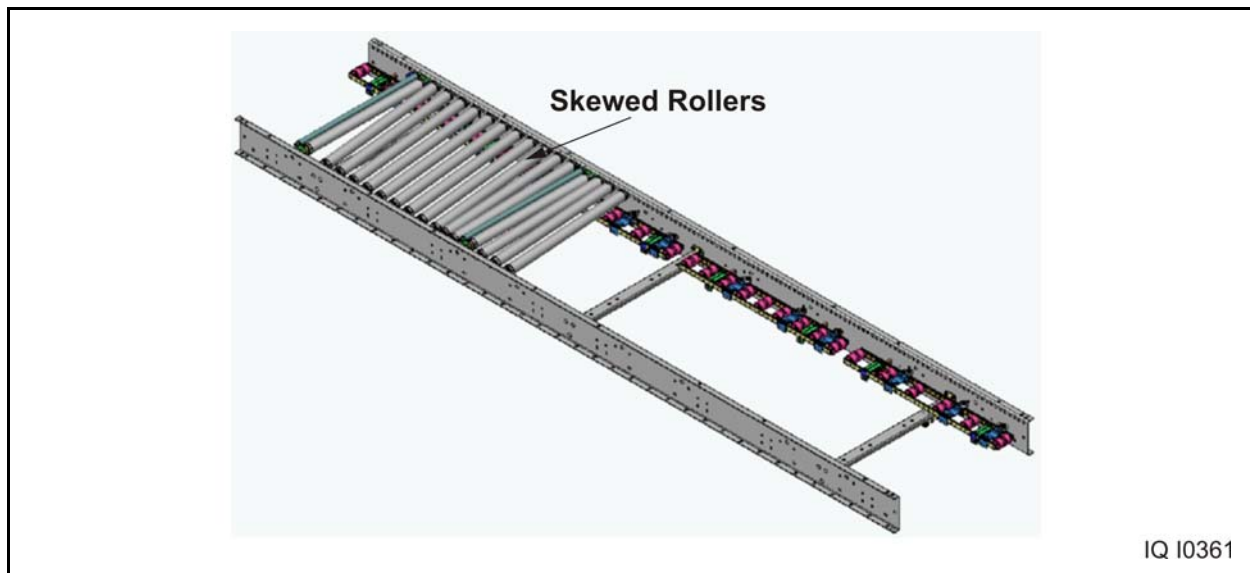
72 IntelliQ® Accumulation Conveyor Skew Assembly
